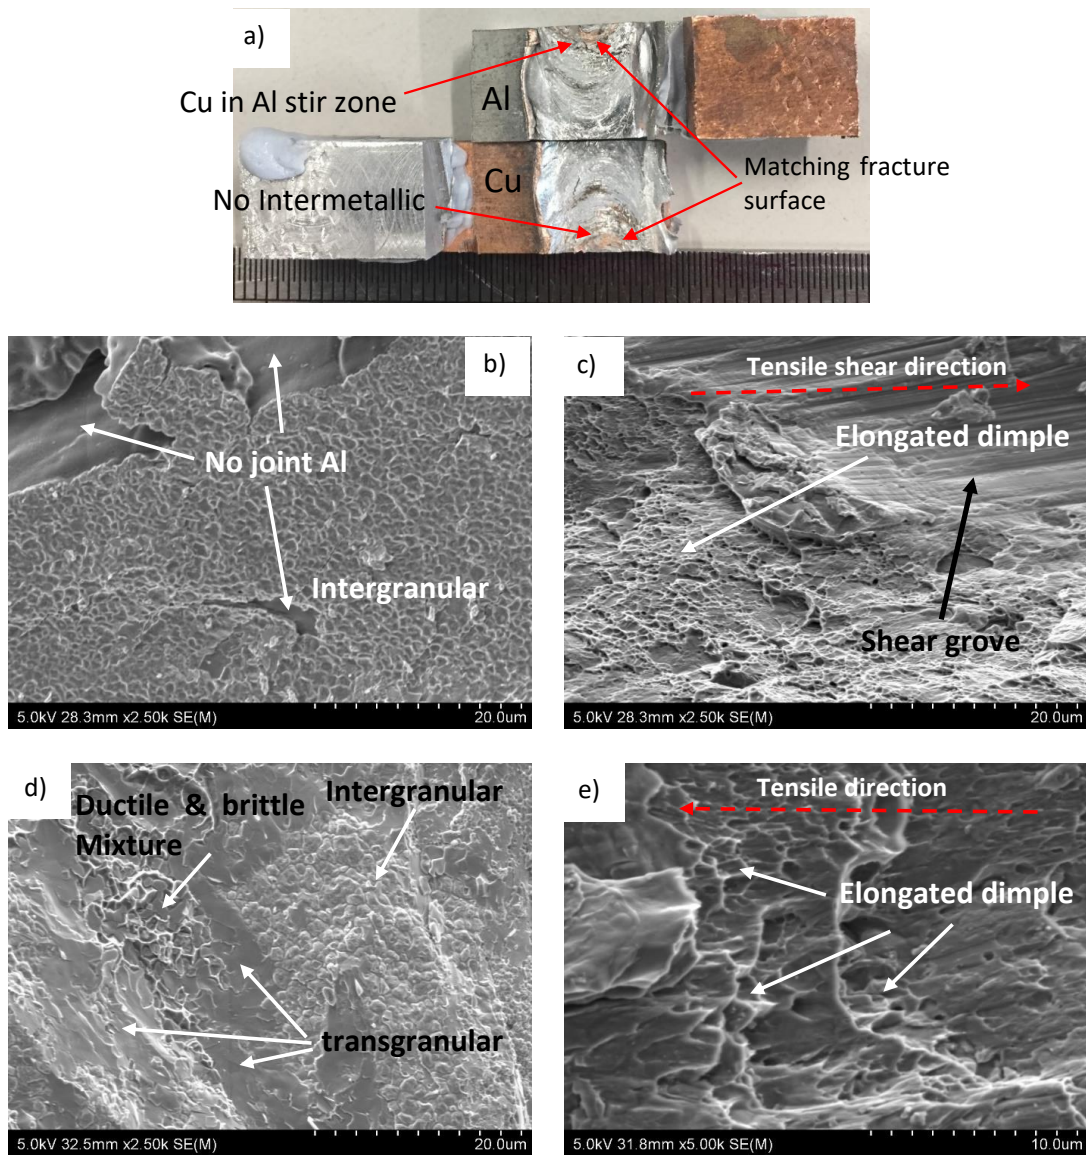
11 (a) Fracture surface of broken tensile shear test sample of a weld with a d_p of 0.5 mm; (b)-(c) aluminium side fracture surface; (d)-(e) fracture surface of copper side.
